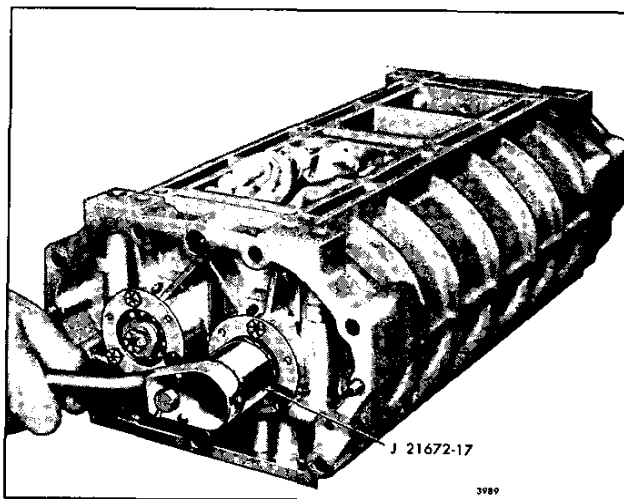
Removing Rotor Bearing Retaining Nut Using Tool J 21672-17
